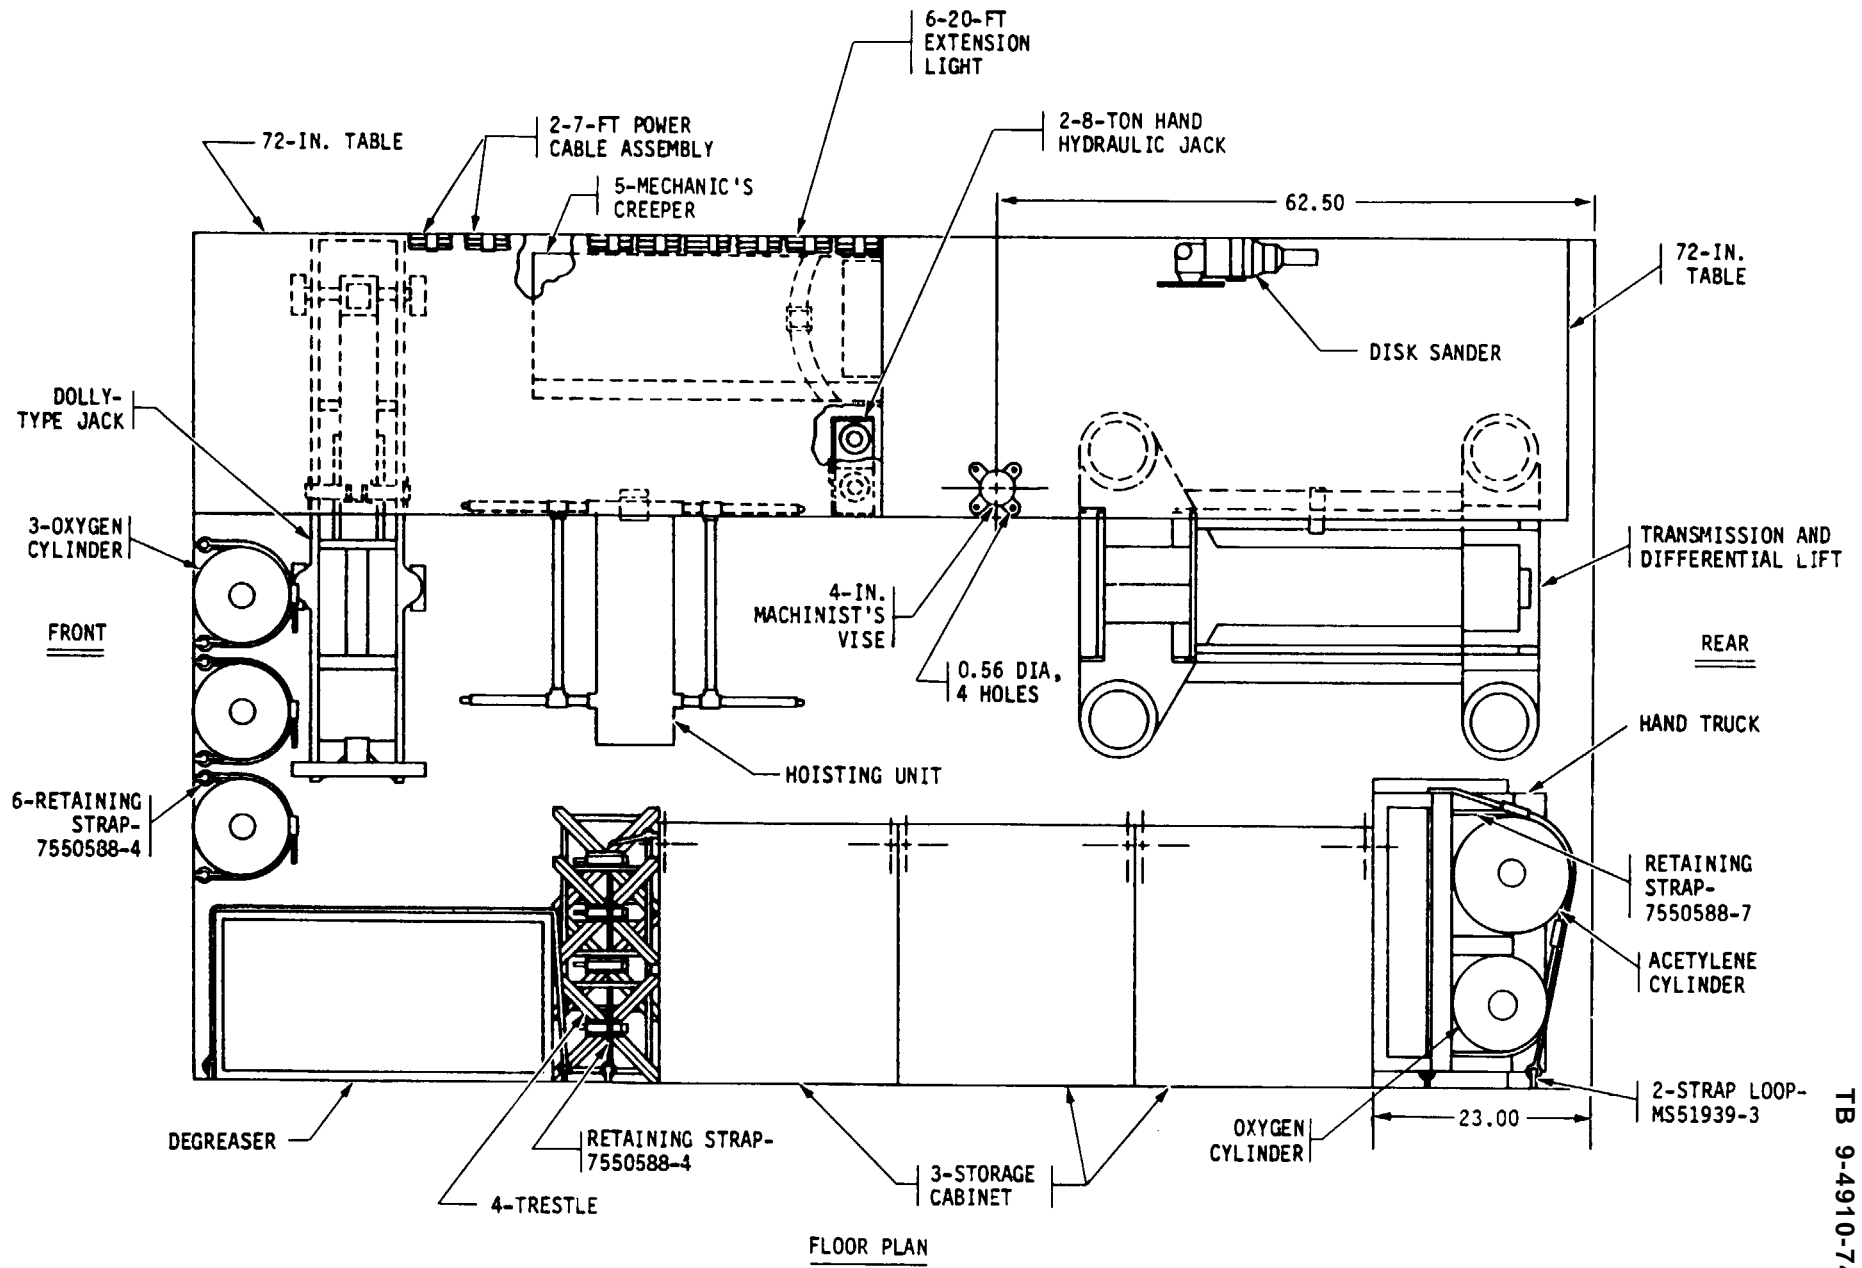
Components to be Mounted, Unit 3, M35A2, Floor Plan.
